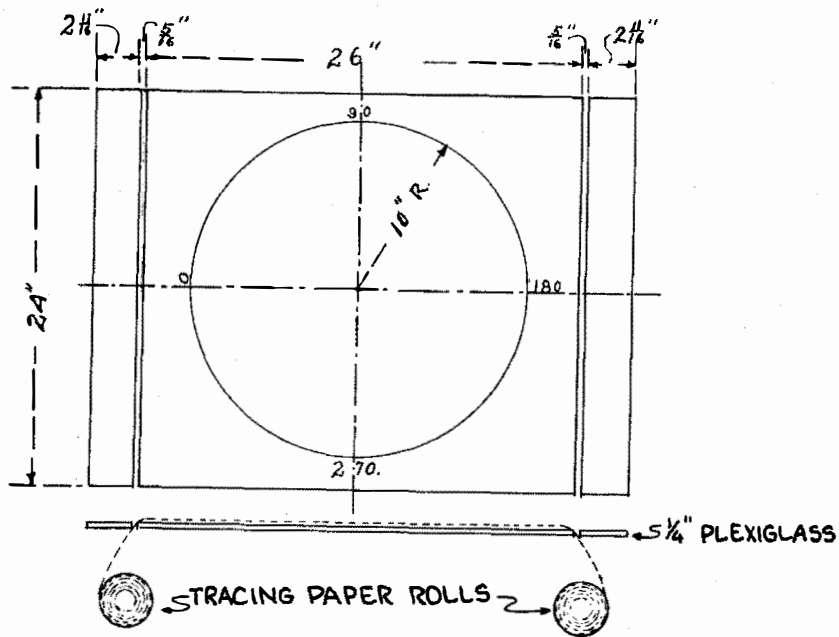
Diagram of plexiglass, showing dimensions of three pieces. A 20" diameter maneuvering board is traced on the center piece. Paper passes from rollers over this piece.
